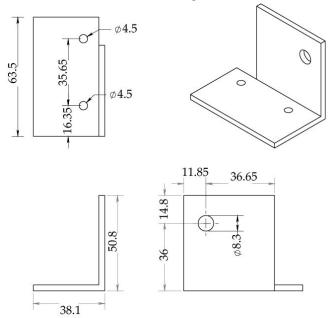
Servo Center Sensor Mounting Bracket (All Dimensions in mm)
